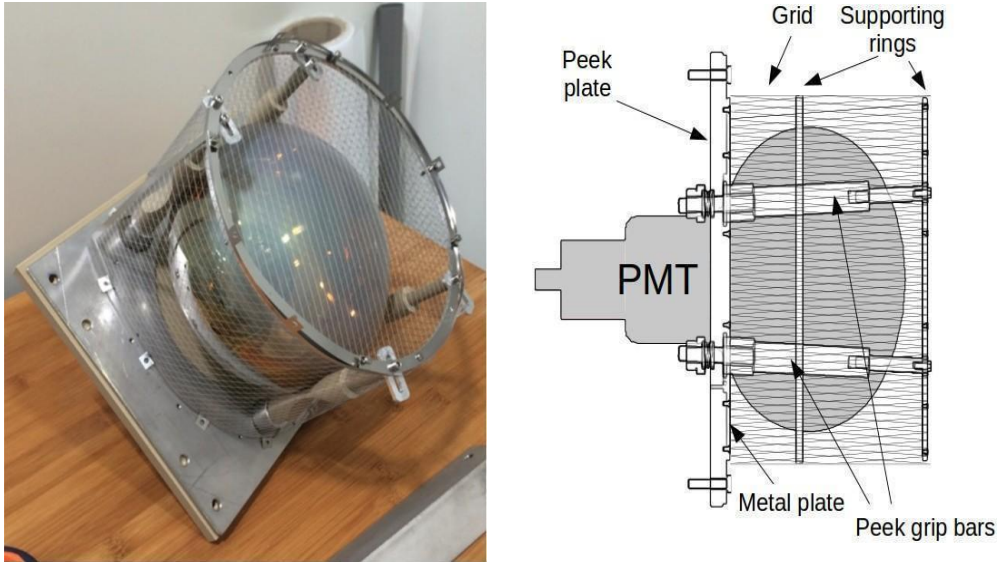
Picture (left) and CAD drawing (right) of the PMT support.
